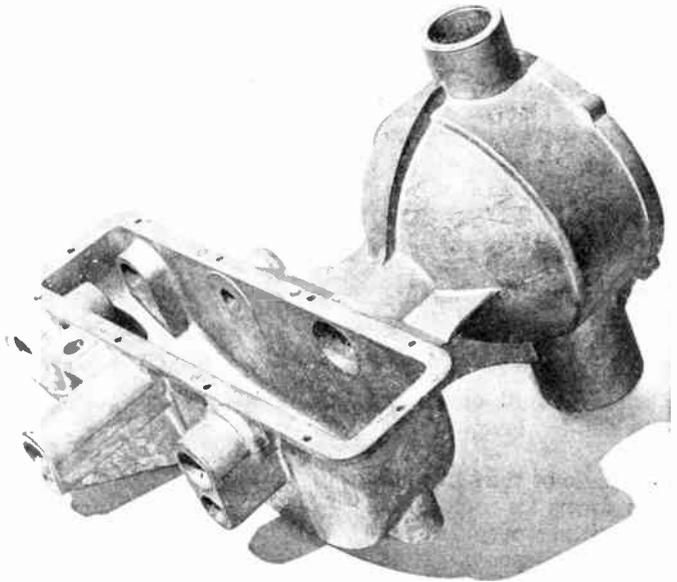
A COMPLICATED DIE CASTING IN MAZAK ALLOY.
